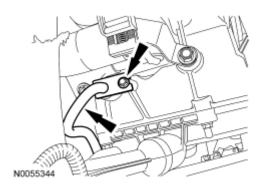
Identifying Engine Front Cover Bolts Courtesy of FORD MOTOR CO.
